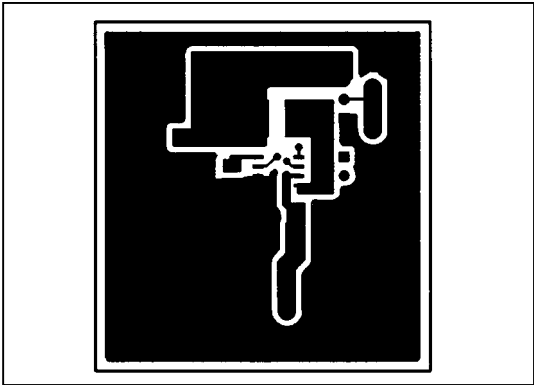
MAX877 EV Kit PC Layout (Component Side)
